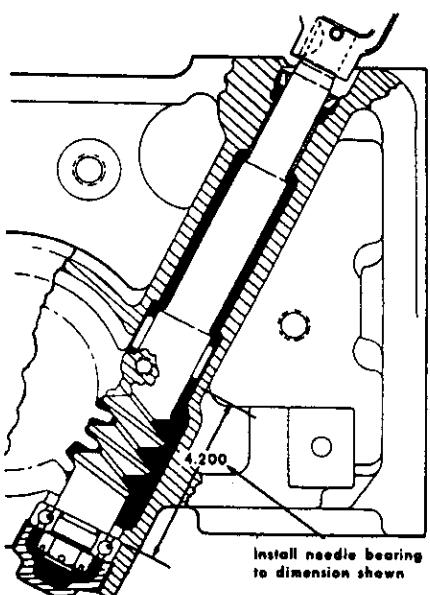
When renewing needle bearing in Series 424 or 444 mechanical steering gear housing, install the bearing to dimension shown.
